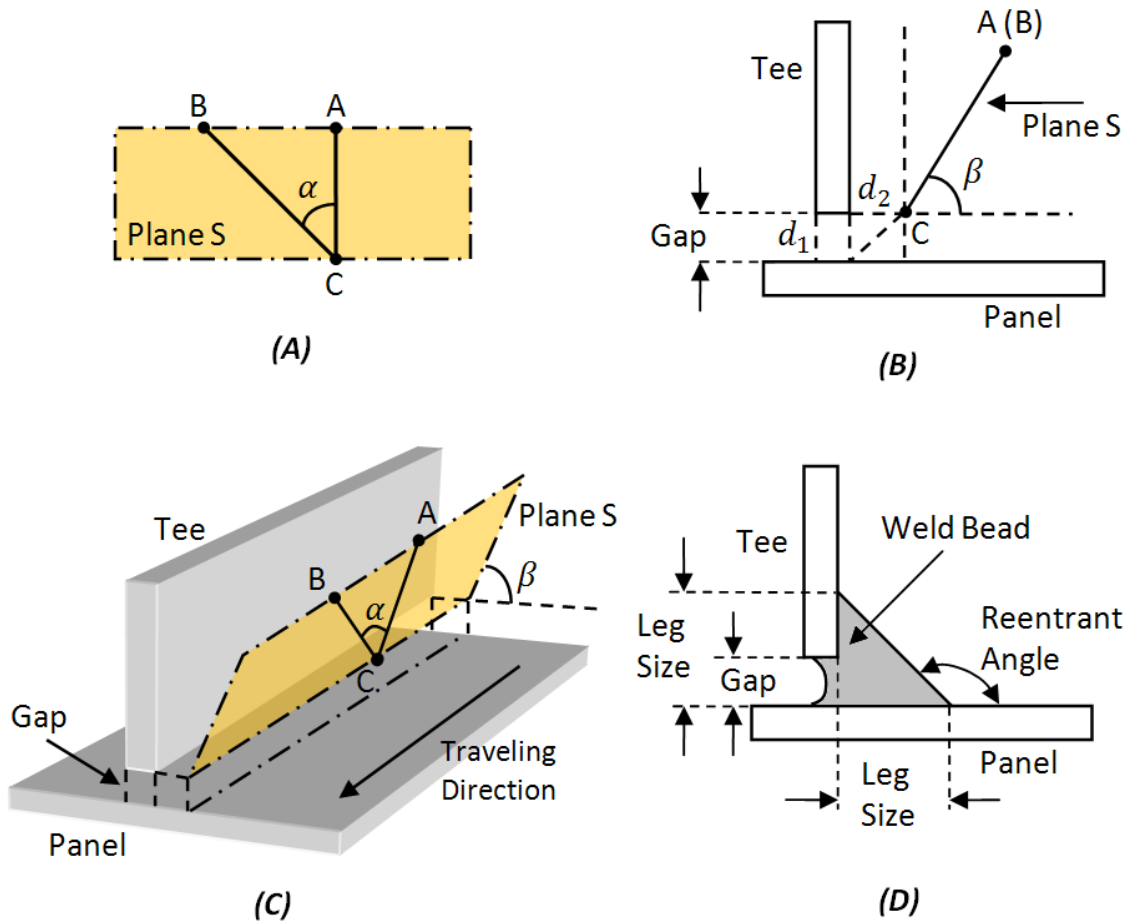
Relative Positions of Wires and Work-Pieces in DE-SAW for Fillet Joints
